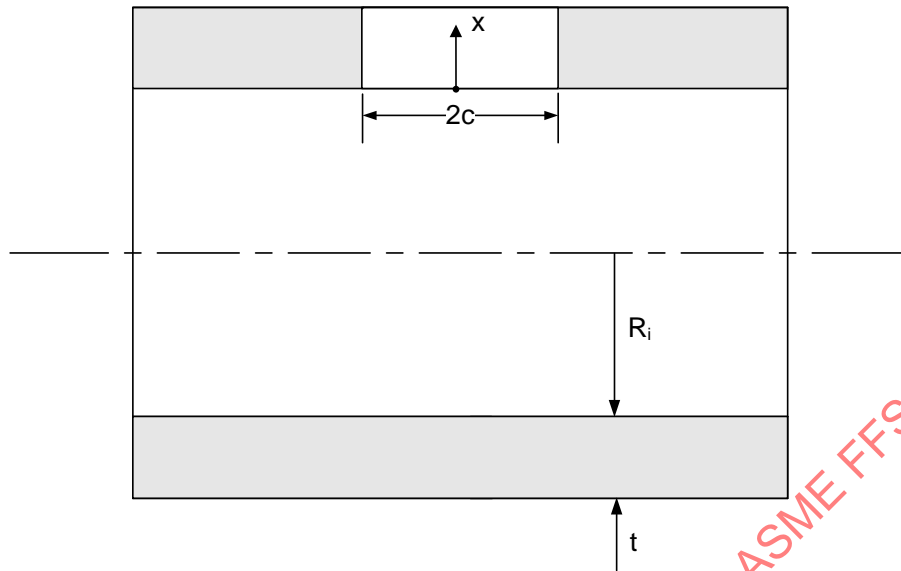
B.11 – Cylinder – Through-wall Crack, Longitudinal Direction
